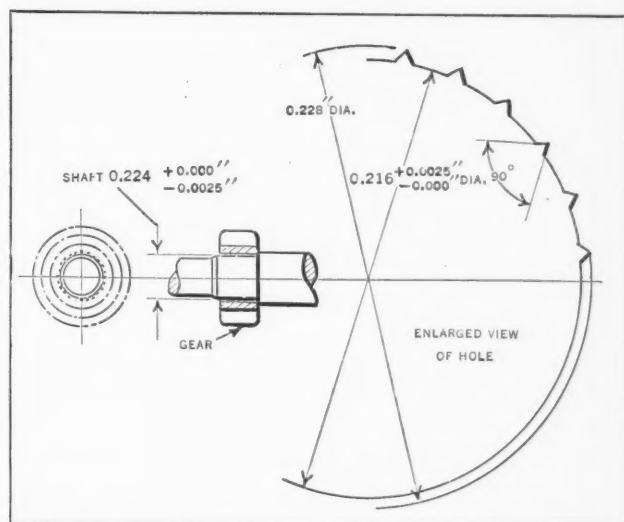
Comparatively Wide Gear, and Enlarged View of Broached Serrations or Notches to Insure Better Grip
